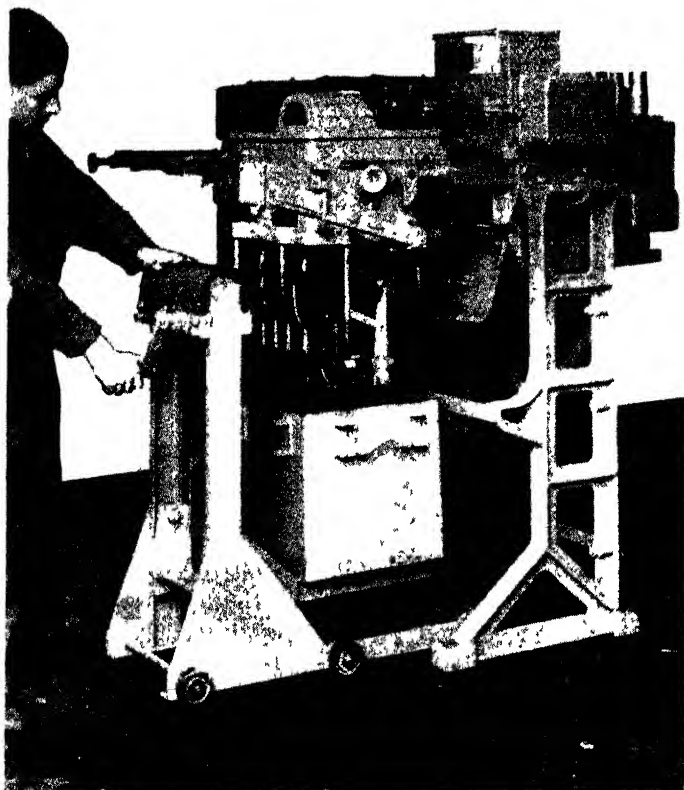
TANK LOWERING AND SWITCH REMOVAL TRUCK—
